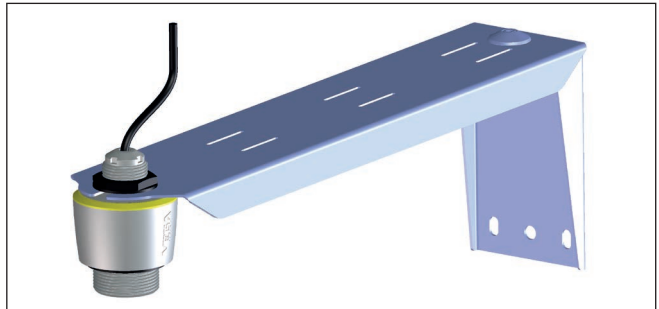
Mounting bracket for extendable wall mounting - example compact sensor with mounting thread G1½
